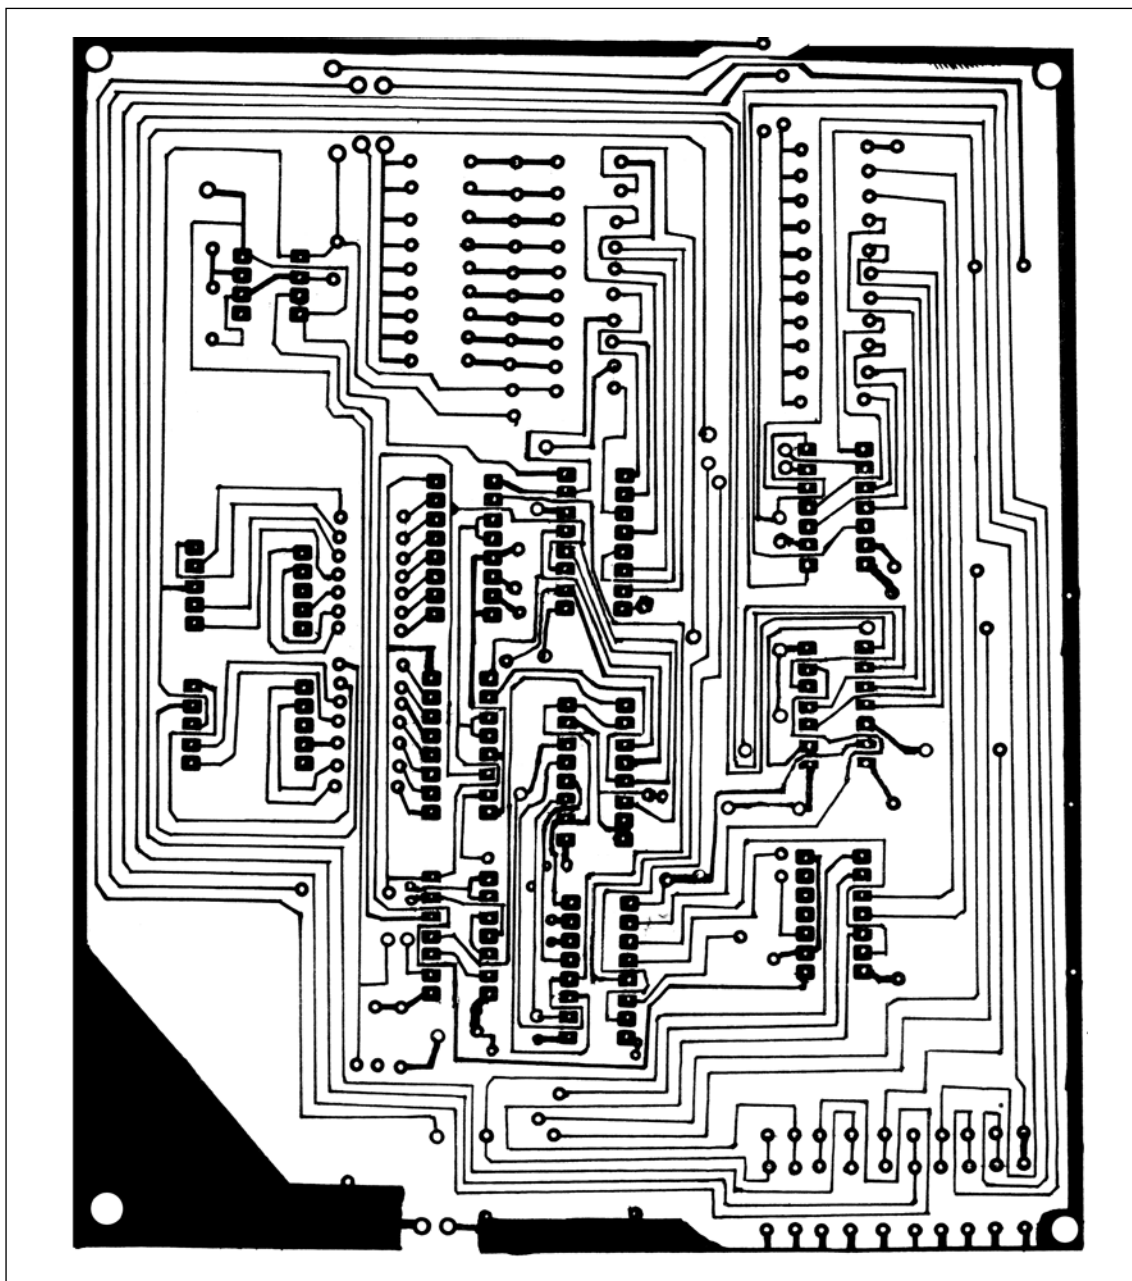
Actual-size PCB layout for the circuit shown in Fig. 2.
